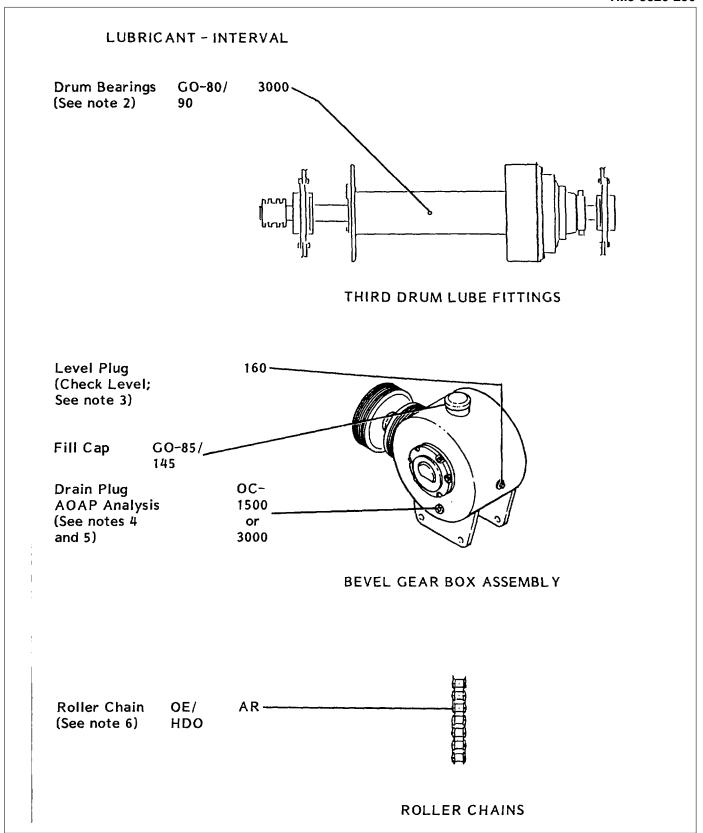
Lubrication Instructions for Drawworks (Sheet 2 of 3).
